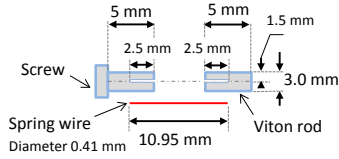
Illustration of the screw, Viton rod and spring wire. The spring wire is inserted into the holes, connecting the screw and Viton rod together.
